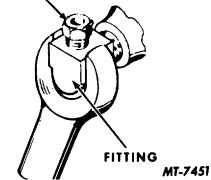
Protecting Fitting Against Damage During Removal or Installation
